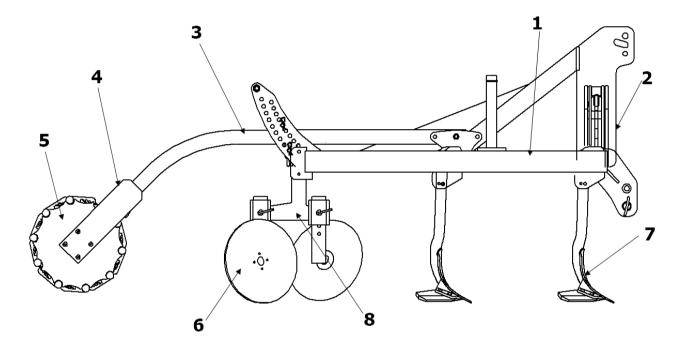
KUS B unit design: 1 - cultivator frame, 2 - three-point hitch turret, 3 - shaft arm, 4 - shaft clamp, 5 - shaft, 6 - levelling disc, 7 - plough beam, 8 - levelling disc holder.
